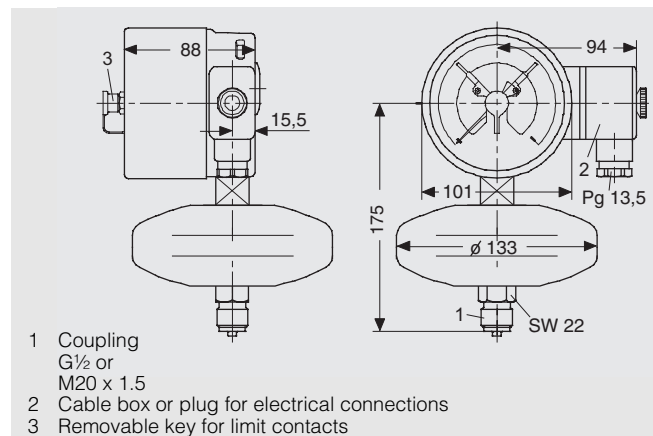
/160 Pressure gauge with limit contacts, dimensions
